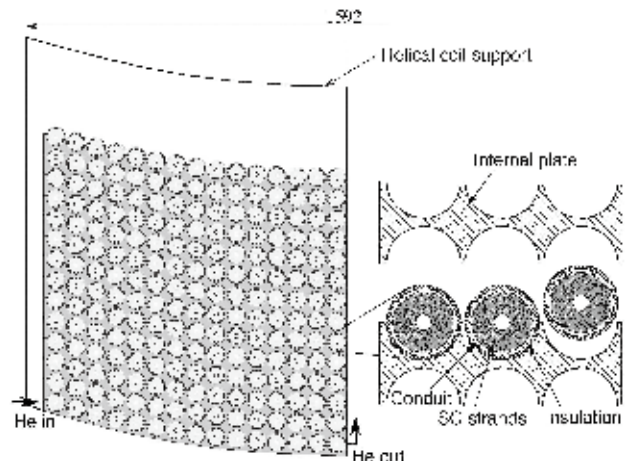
Concept of helical winding with CIC conductors. The helical coil support is assembled after winding.
